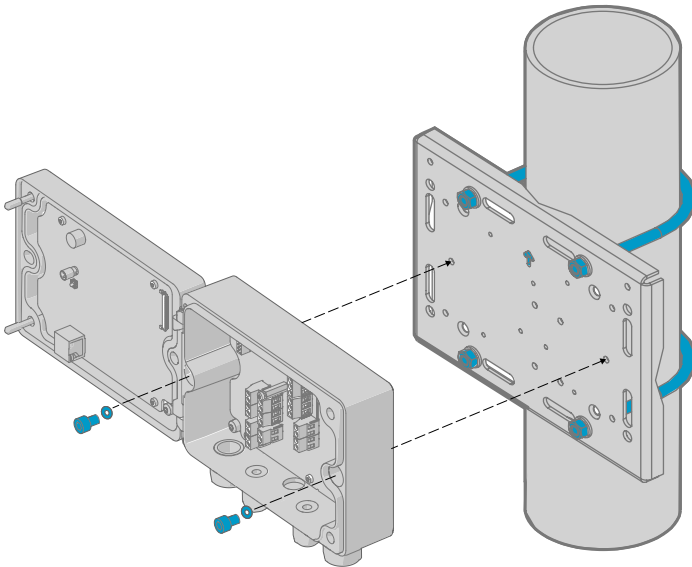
Attaching transmitter to mounting plate - vertical pole mounting
